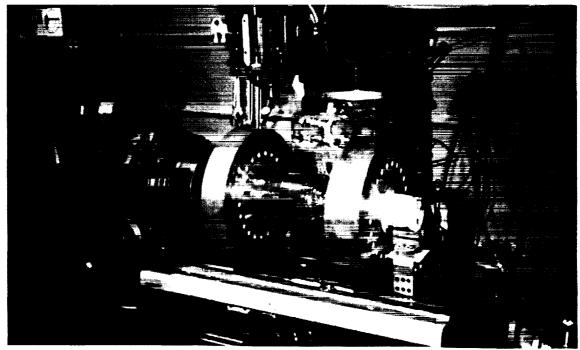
End Milling Inlet and Outlet Port Holes in Manifolds
